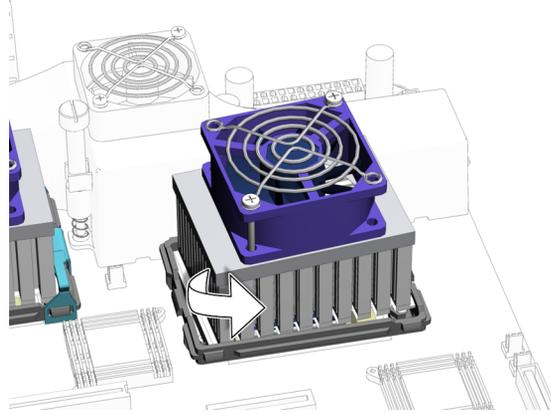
Rotating the CPU Fan and Heat Sink Assembly Counterclockwise
